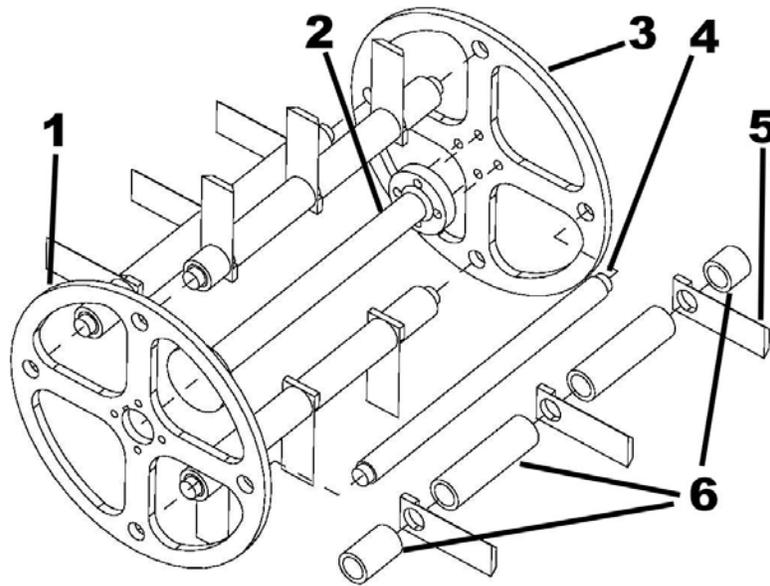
Cutter: 1) Motor Flywheel, 2) Drive Shaft, 3) Rear Flywheel, 4) Knife Shaft, 5) Blade, & 6) 3 Spacer sizes
